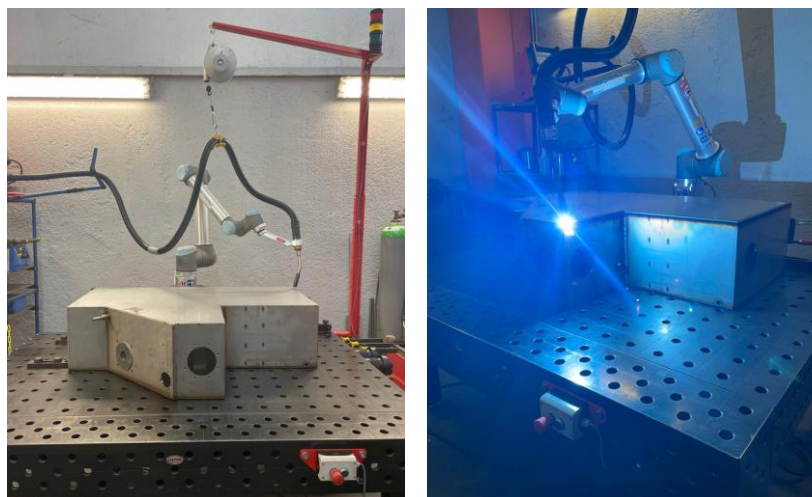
and 6: Workplace for collaborative robot welding at the SME from case study 2
